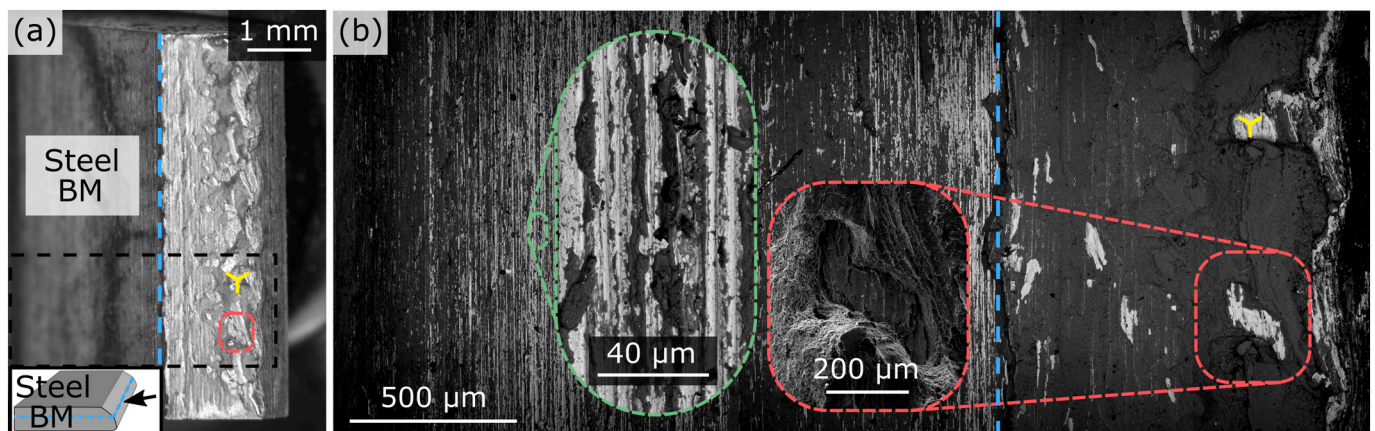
The steel fracture surface resulting from tensile testing of specimen R2. (a) Optical micrograph. The bottom inset illustrates the viewing direction, and the blue lines indicate the boarder between the top and the bottom part of the fracture surface. (b) BSE SEM image where steel appears light grey and Al dark grey. The inset outlined in green displays a SE SEM image of residual Al found on the upper part of the steel, while that in red shows a SE SEM image of a dent in the residual Al. (For interpretation of the references to colour in this figure legend, the reader is referred to the web version of this article.)
